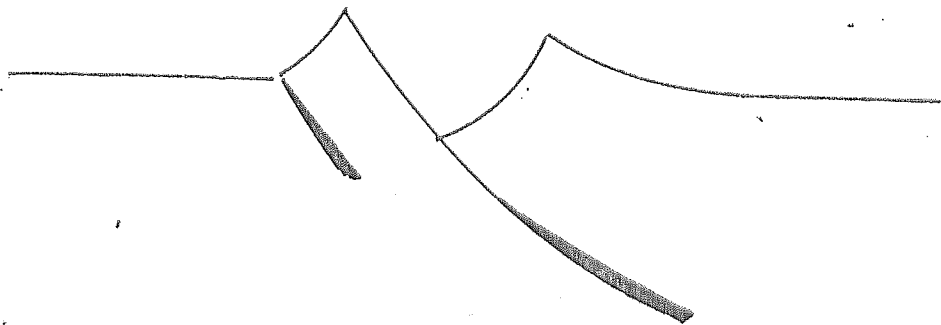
Undercutting of a Fracture Surface due to crack "forking" (after Andrews)
